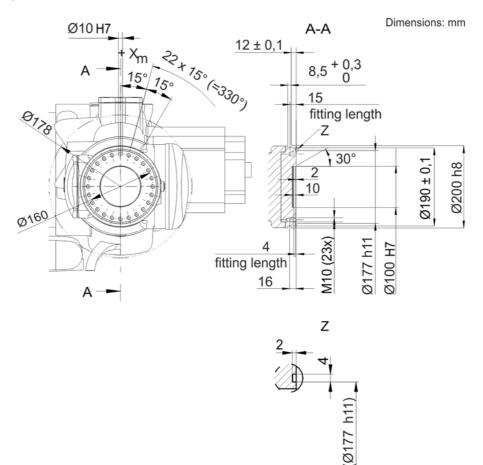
Mounting flange D=160 for F-HP in-line wrist
